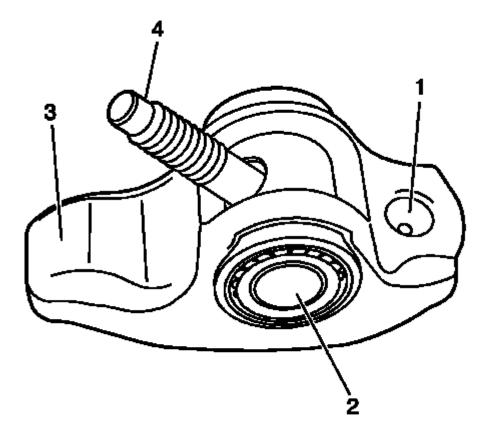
View Of Valve Pushrod Socket, Roller Pivot & Valve Stem Tip Courtesy of GENERAL MOTORS CORP.
